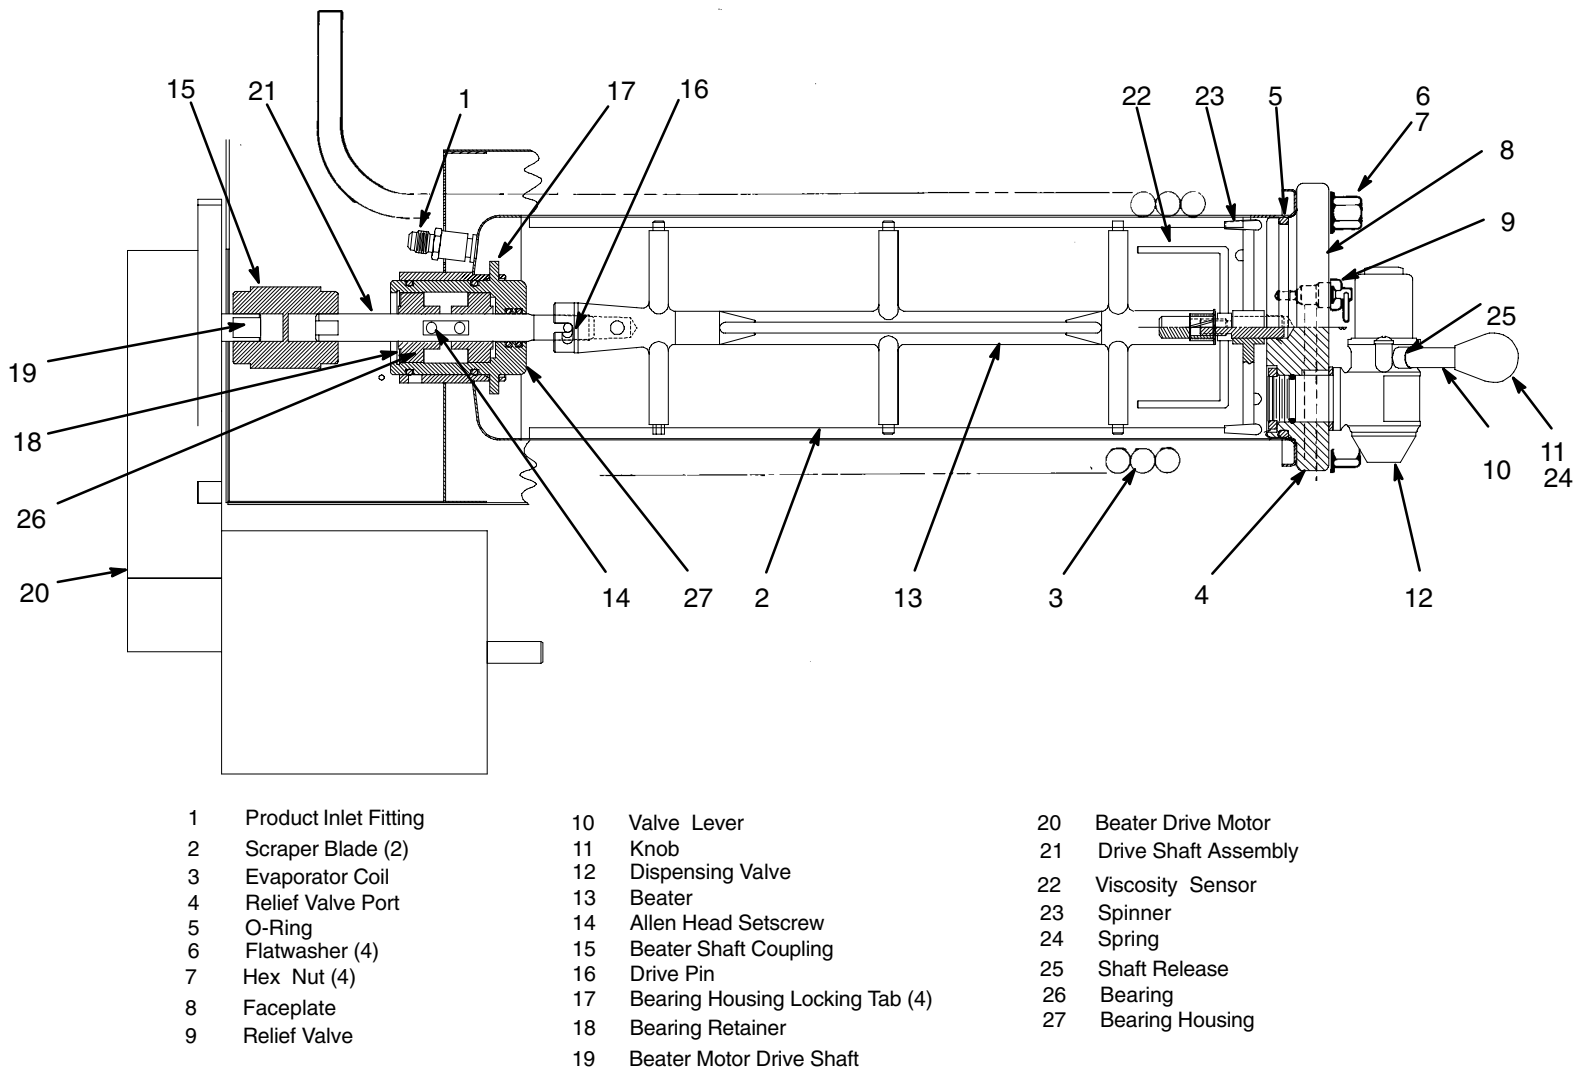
FREEZE CYLINDER CUTAWAY VIEW
